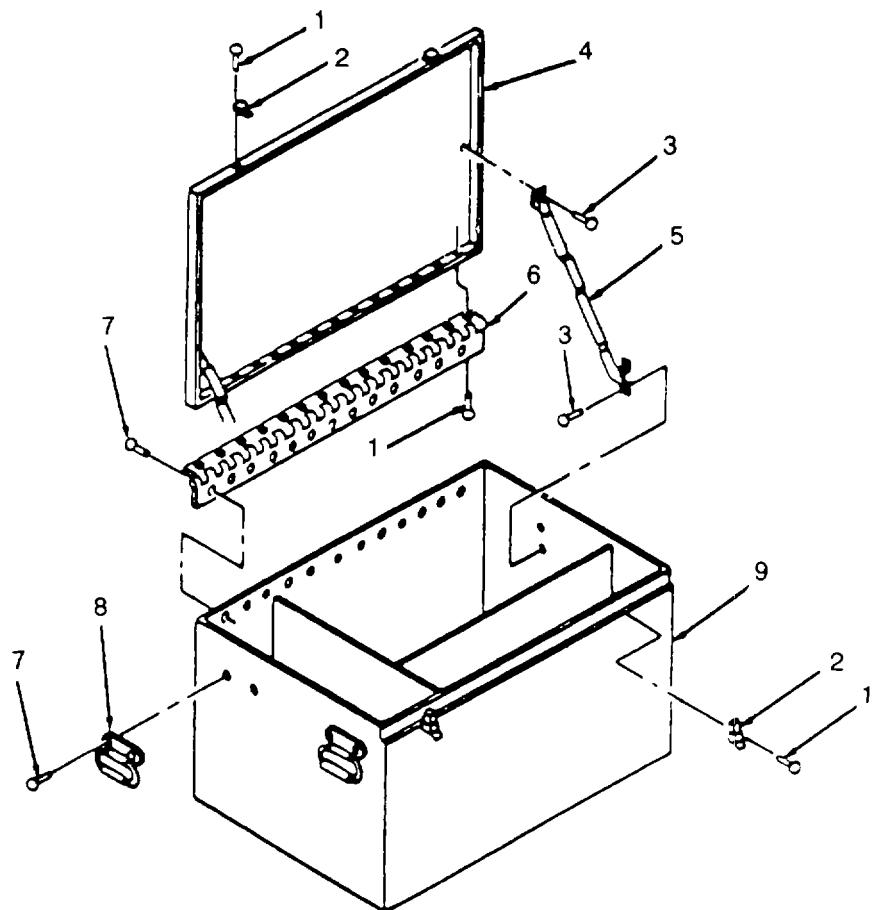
Hoseline Flow Control Kit, Chest Assembly.
